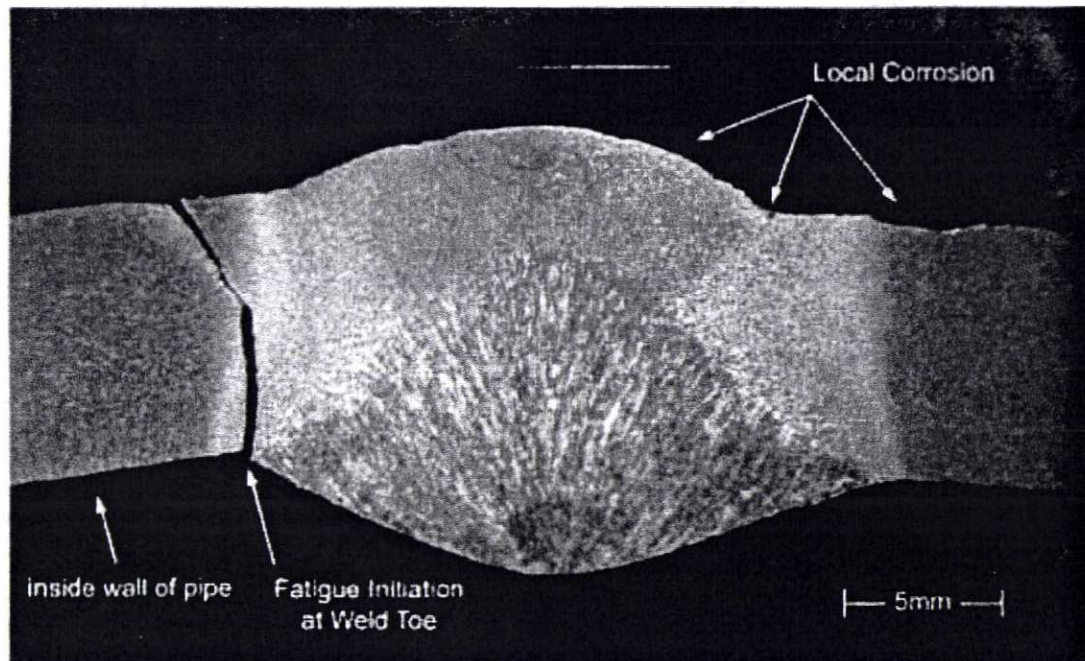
Fatigue initiating at toe of weld on interior surface of pipe.
